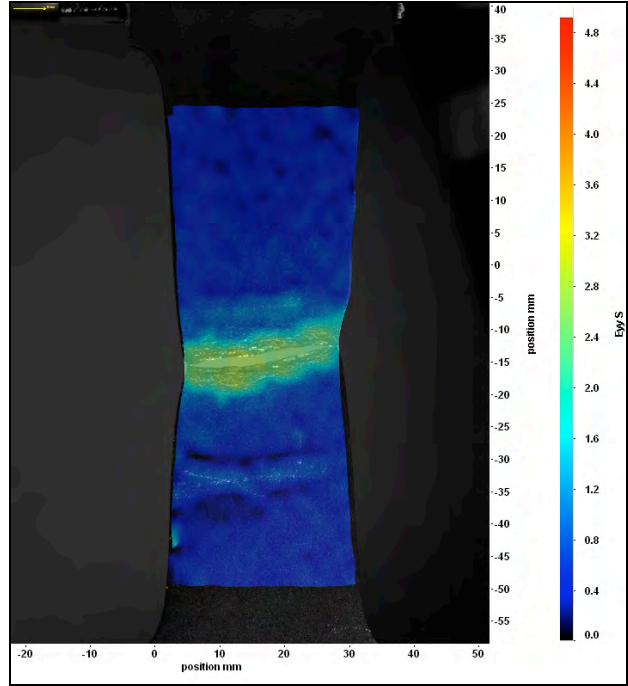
Strain map of an FSWeld. Tube material is on the top and lid material on the bottom. The fracture occurs between the weld and the lid material.
